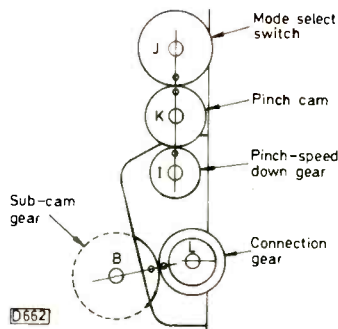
Assembly/alignment of the items on the top of the mechanism.
